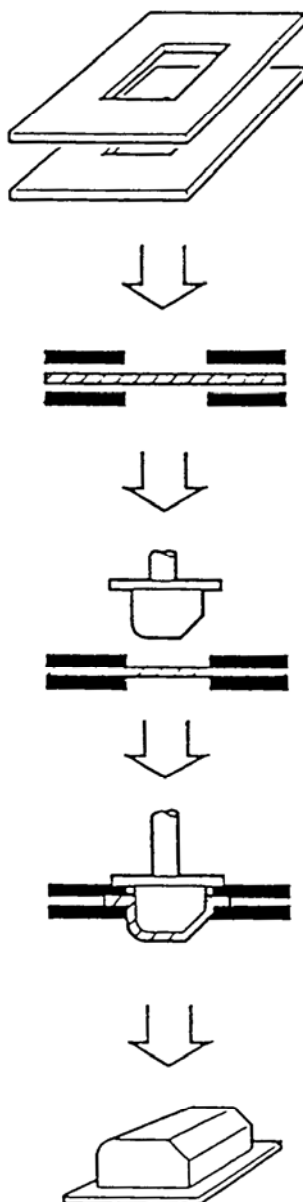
Deep drawing of woven fabric thermoplastic component
